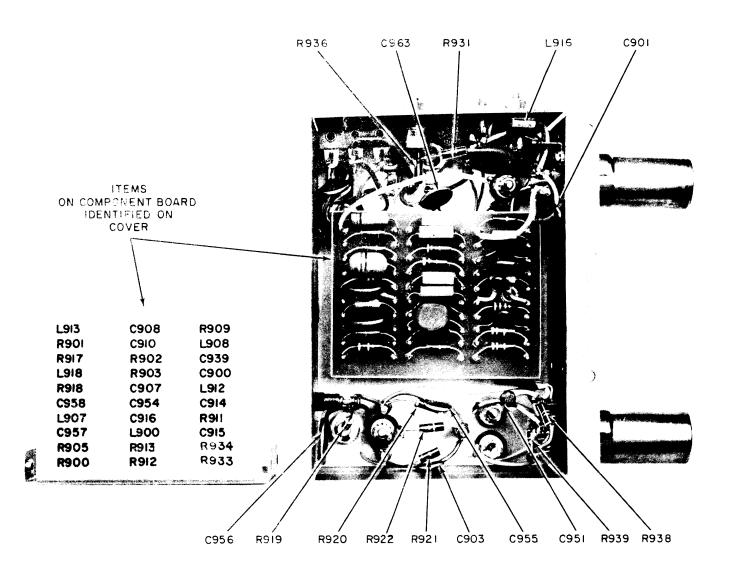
PA Sense Chassis (Sheet 1 of 2)
